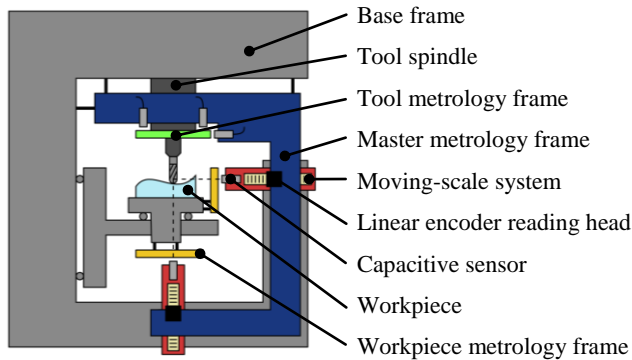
Layout of the integration of metrology frames and a moving-scale measurement system in a machine tool.
